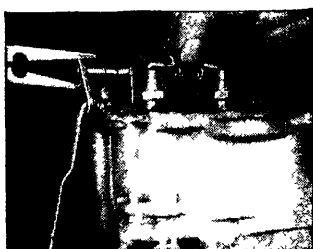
Install pump arm and counter-shaft, anti-percolator arm and metering rod arm. Install pump connector link. Check for wear on both ends of throttle connector rod
